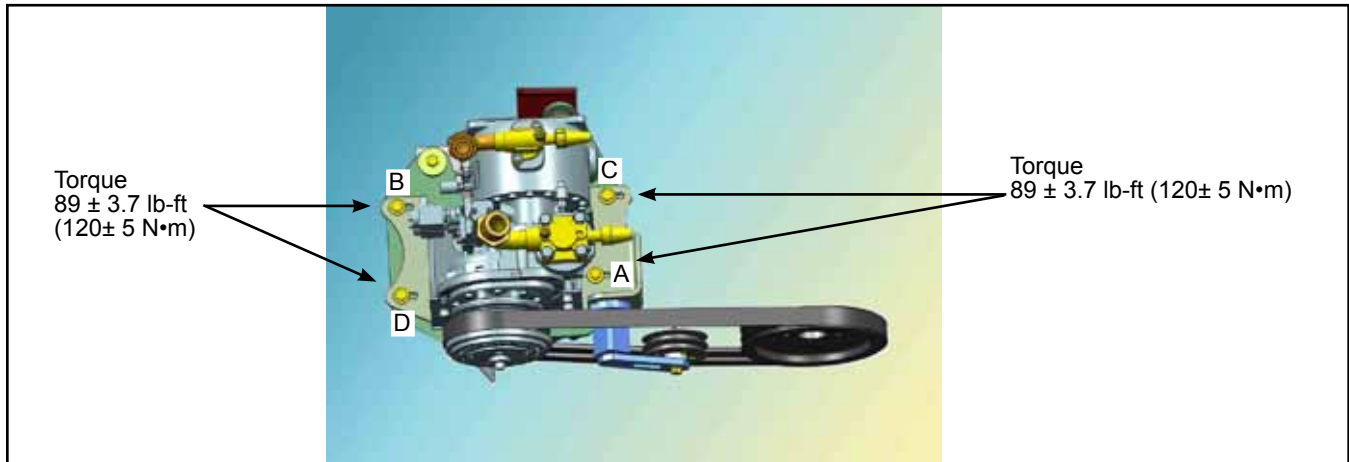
A/C Compressor Plate Retaining Bolts Torque and Sequence
